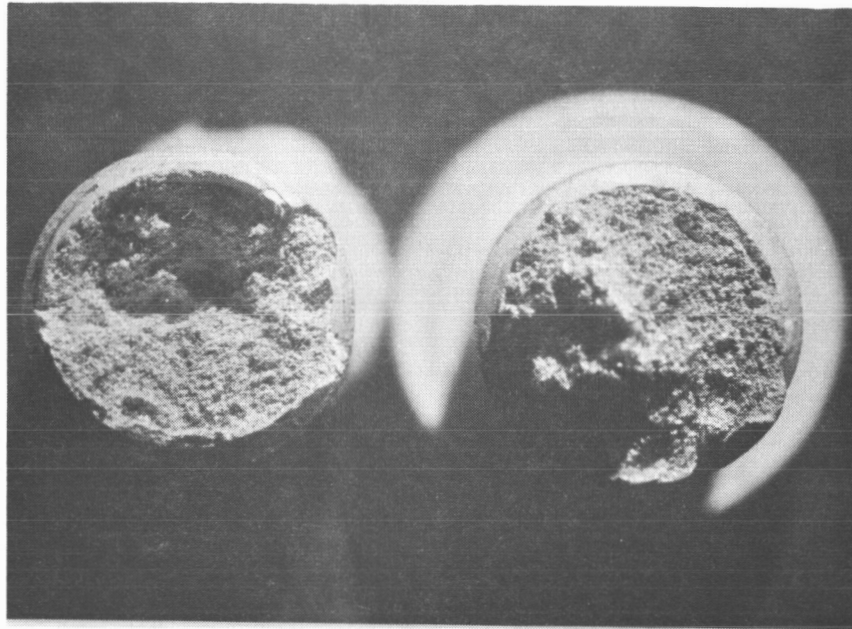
FRACTURE SURFACES, SPECIMEN 1, 8X
